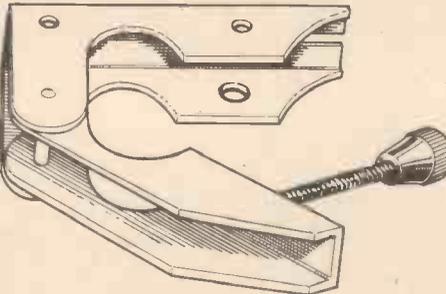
The type of clip most suitable for attachment to the draw tube.
